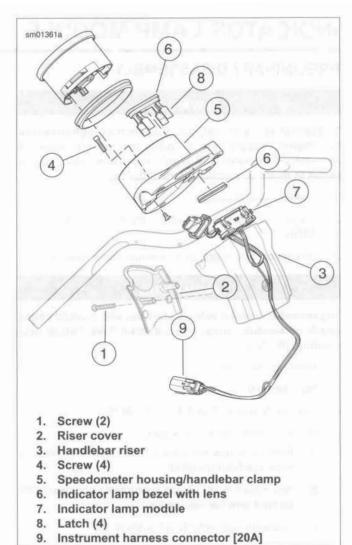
Indicator Lamps: XL 1200C/CP/CA Except w/Mini-Ape Handlebar
